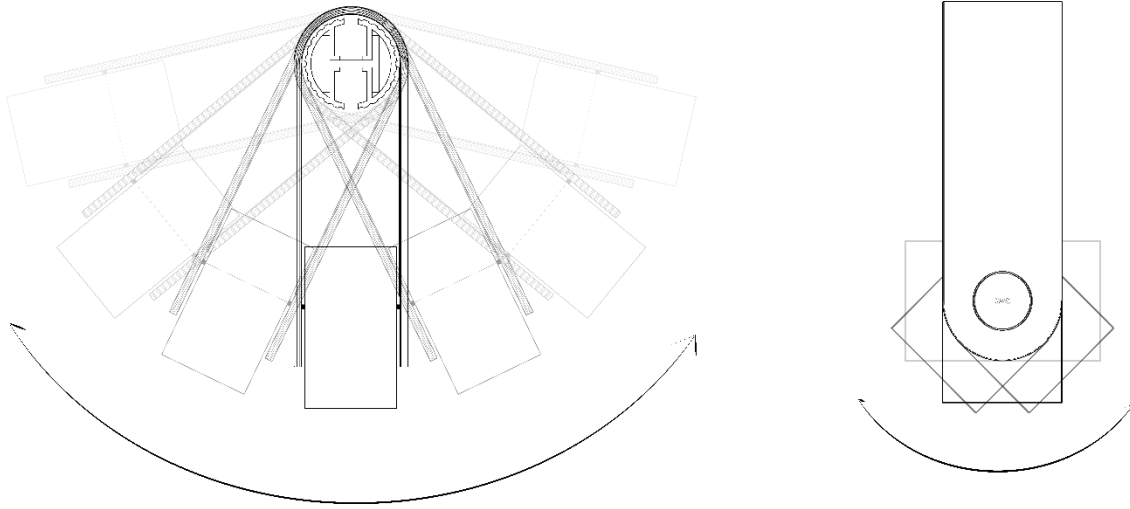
Sketches of how the adjustment of the lighting fixtures should be done.
